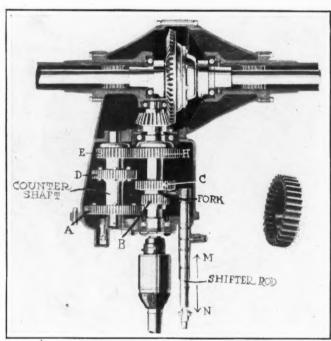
Construction of a progressive gearset in which high speed is reached only by going through second. The shifter fork is attached to the gearshift lever
